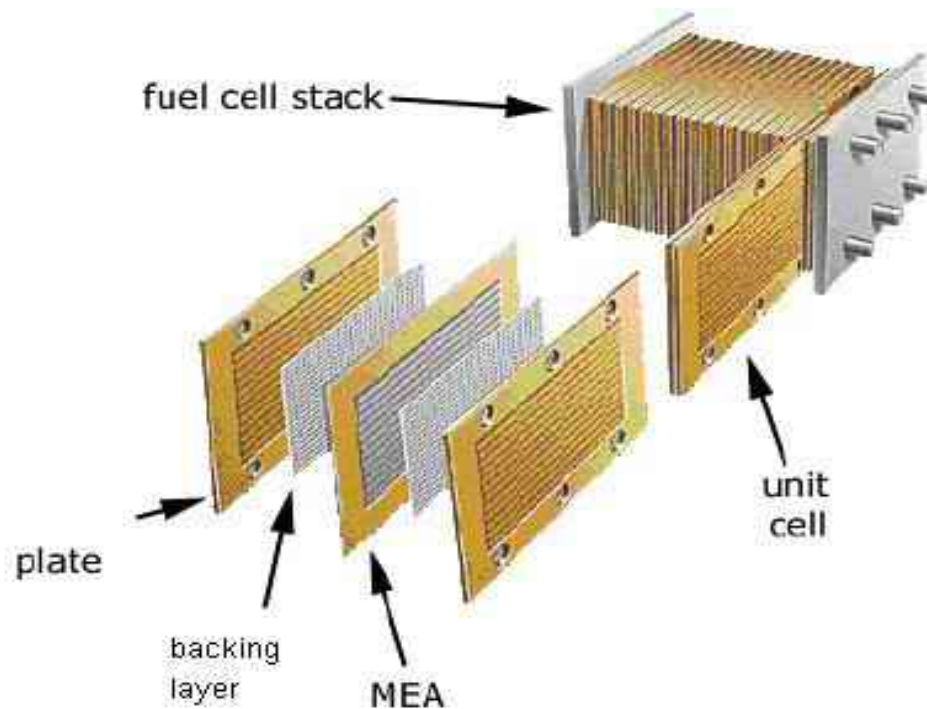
A view of a DMFC stack and an exploded view of a single cell ^[46].
